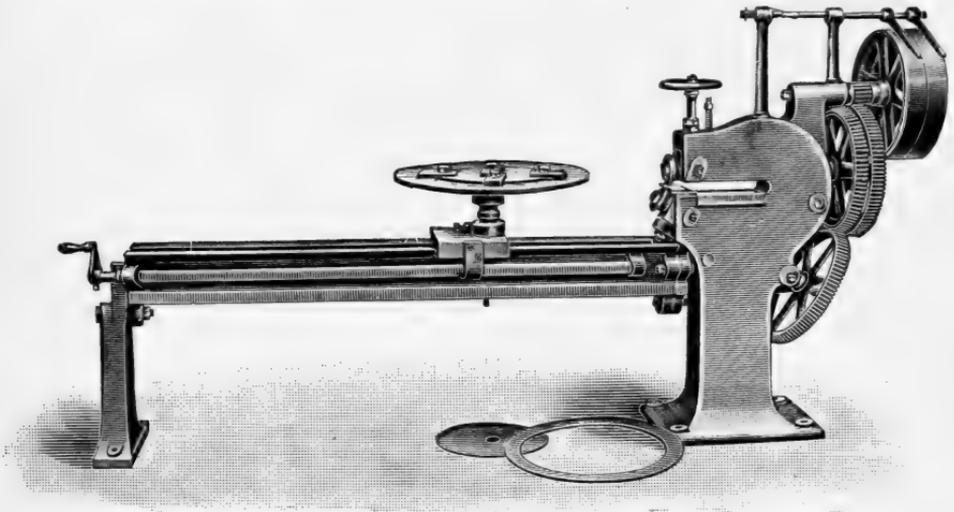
Geared Rotary Shears for Armature Discs and Rings.
